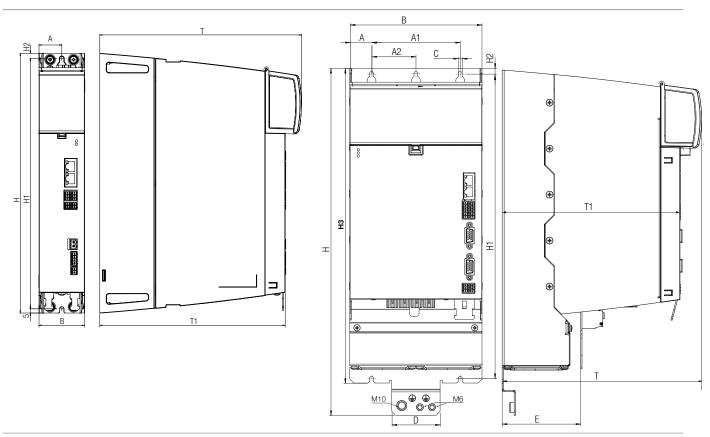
Dimensional sketches, KeDrive D3-DL 300 charging Figure 3.2 module
